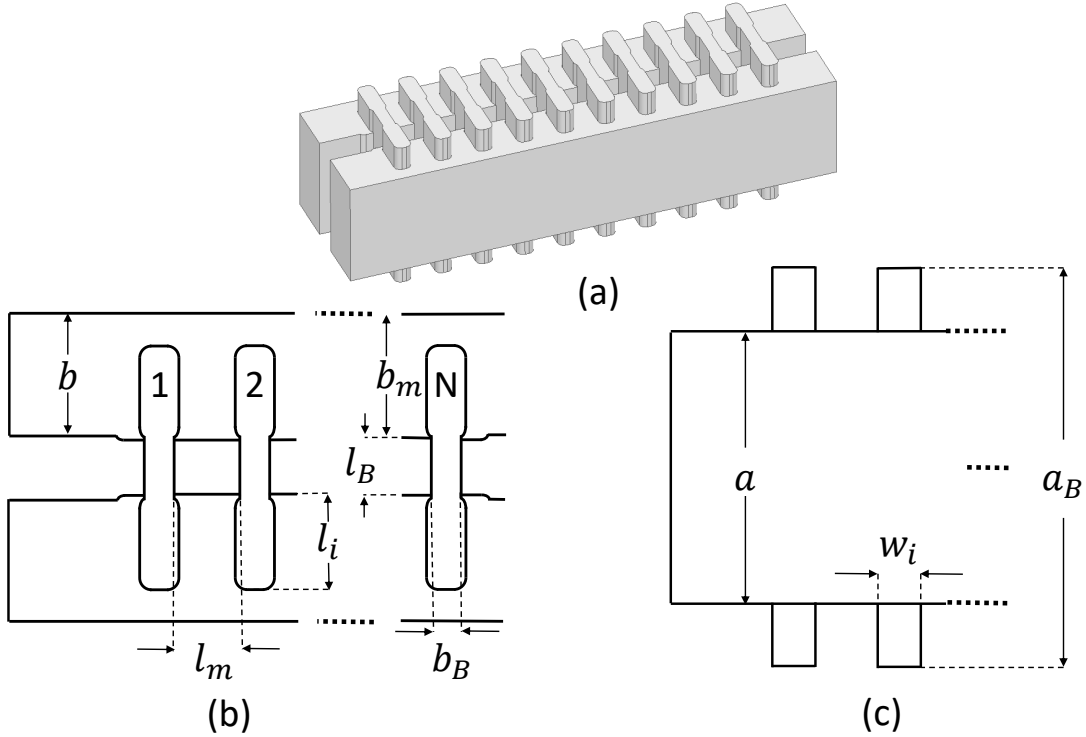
Drawing of the proposed hybrid design indicating critical dimensions. (a) Complete CAD model. (b) E-plane view. (c) H-plane view.
